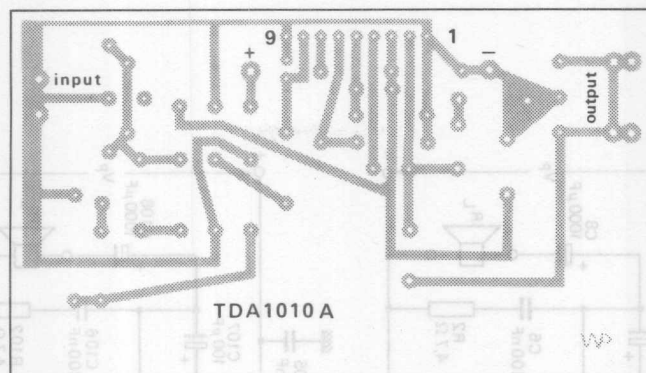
Track side of printed-circuit board used for the circuit of Fig. 9; p.c. board dimensions 92 mm x 52 mm.
